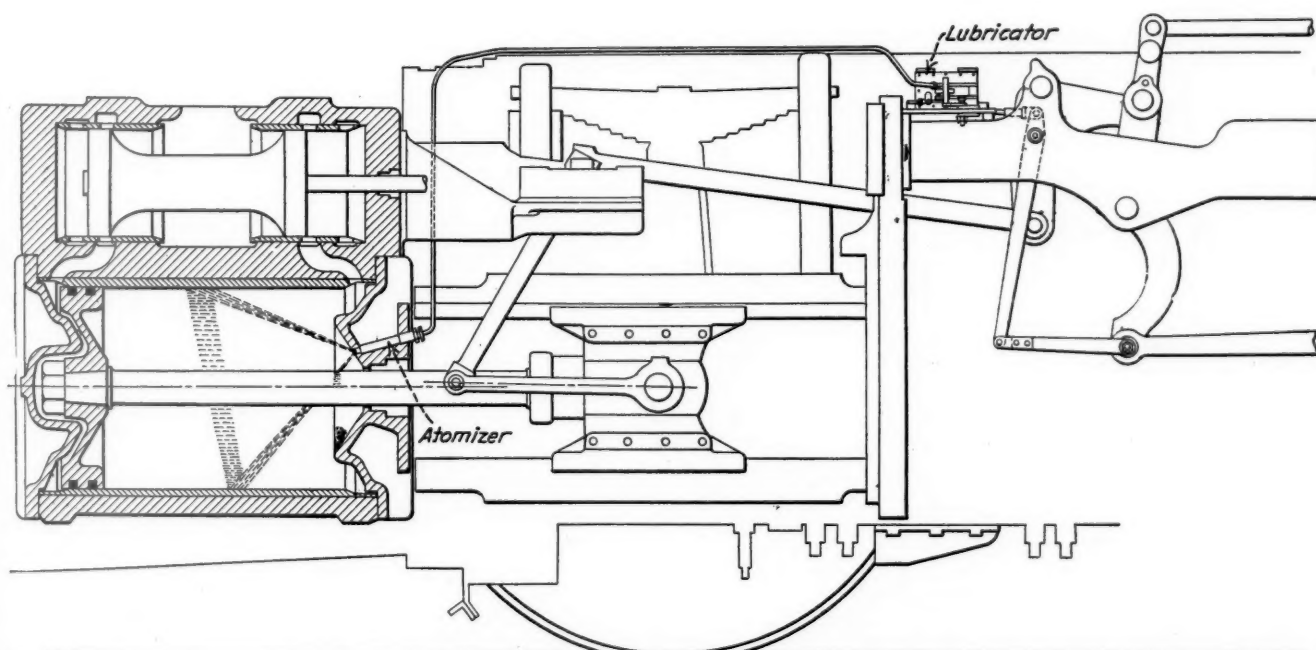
The cross-sectional view of the cylinder shows how the cone-shaped oil spray strikes the cylinder wall and piston rod
